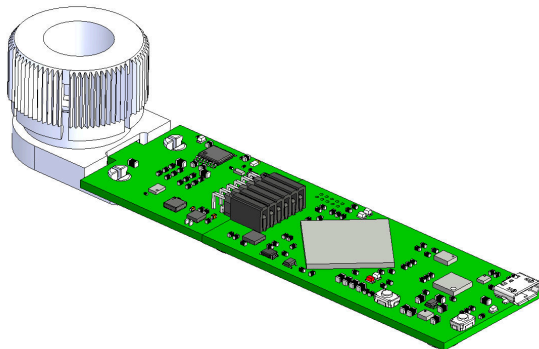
TMAG6180DEVM with Magnet Knob Attachment
